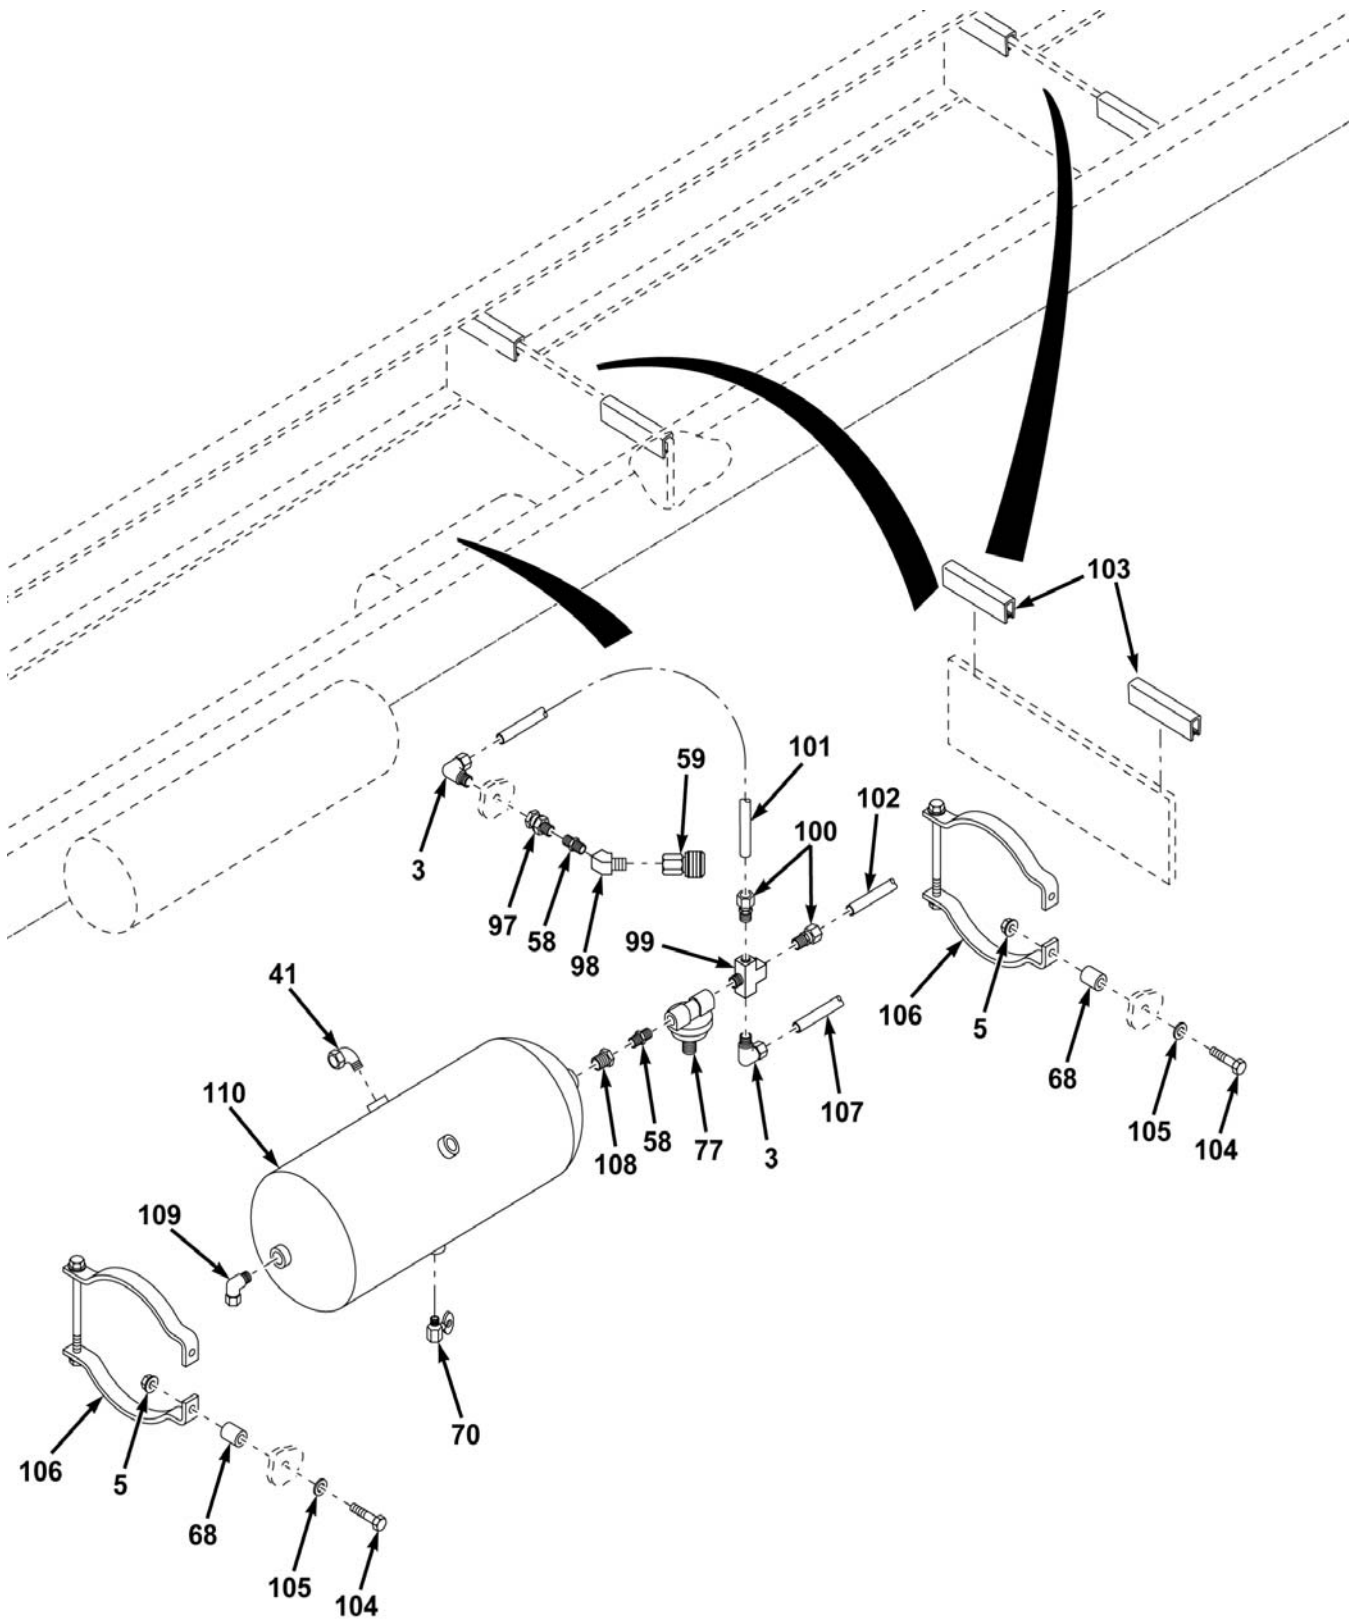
CHASSIS AIR (SHEET 5 OF 15)
